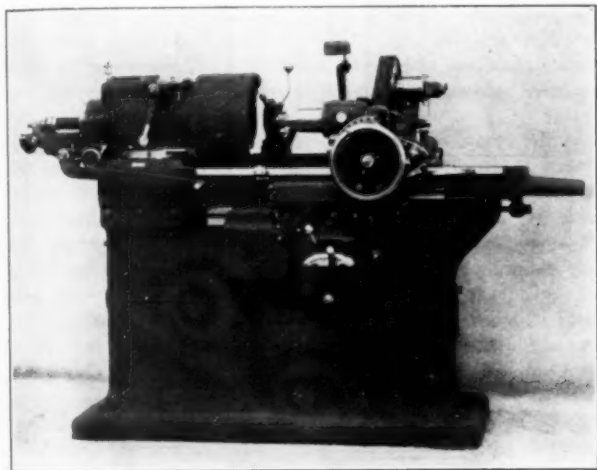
PRESENT DESIGN OF INTERNAL GRINDER
